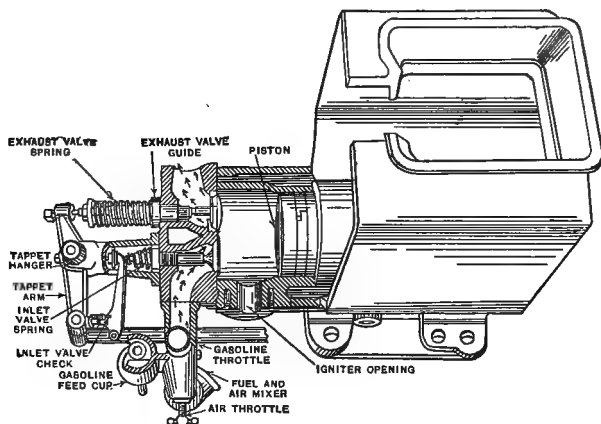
Sectional View of Cylinder of I. H. C. Engine, Showing Integrally Cast Hopper Used in Open Jacket Cooling System.
